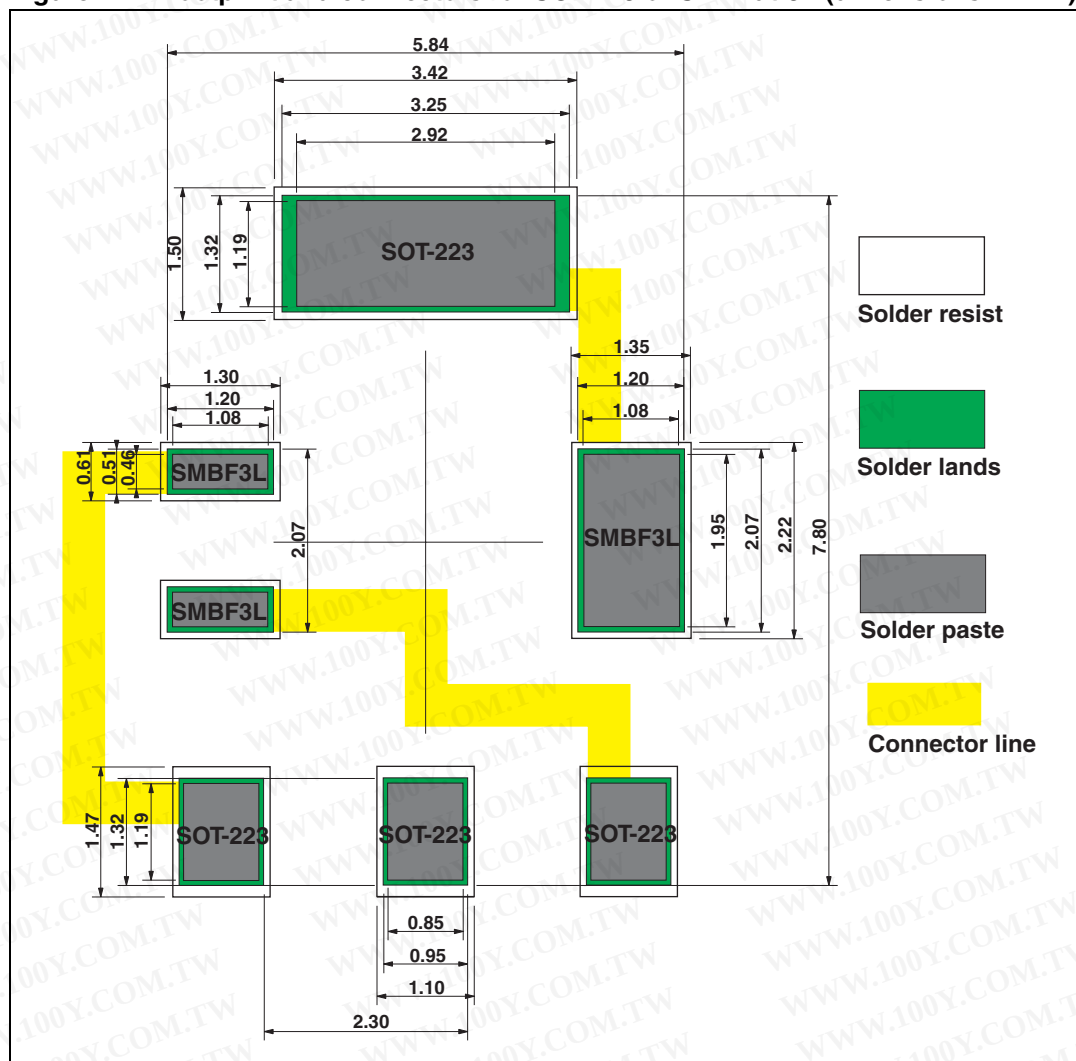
Footprint and connectors for SOT-223 or SMBflat-3L (dimensions in mm)
